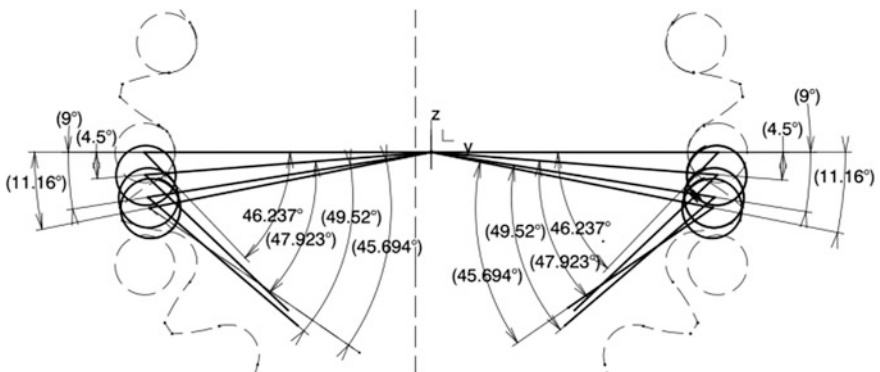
Contact angle for medium profile sprocket and maximum pitch bush chain for the first and last bushing-tooth contact
